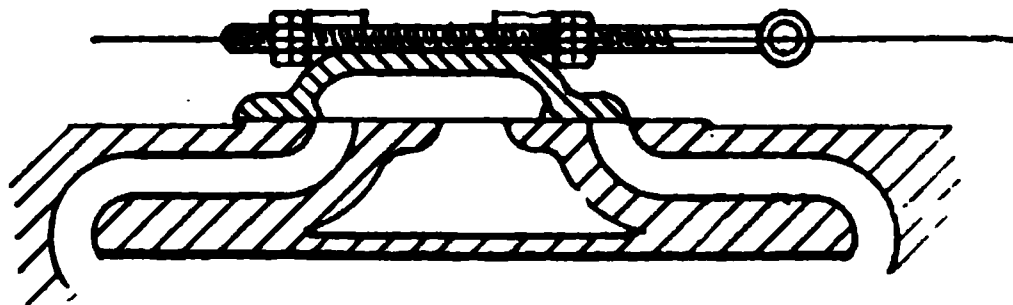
Slide Valve of a Steam Engine, showing position after cut-off of steam from right-hand end of cylinder, the exhaust continuing full from the left-hand end.
